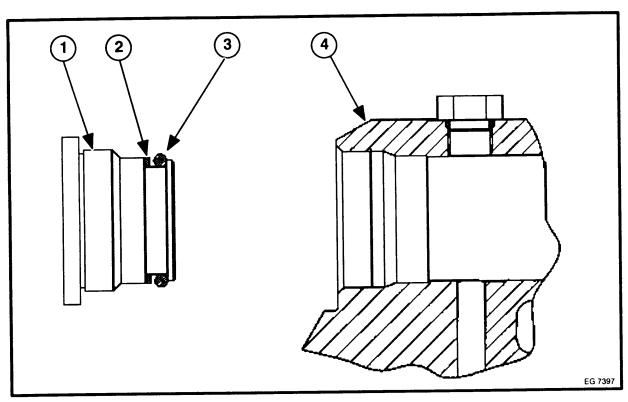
Back Up Ring And O-Ring Locations On Cylinder Head End Plug
